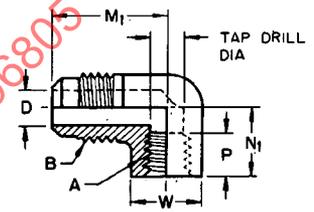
90 DEG INTERNAL PIPE THREAD REDUCING ELBOW
